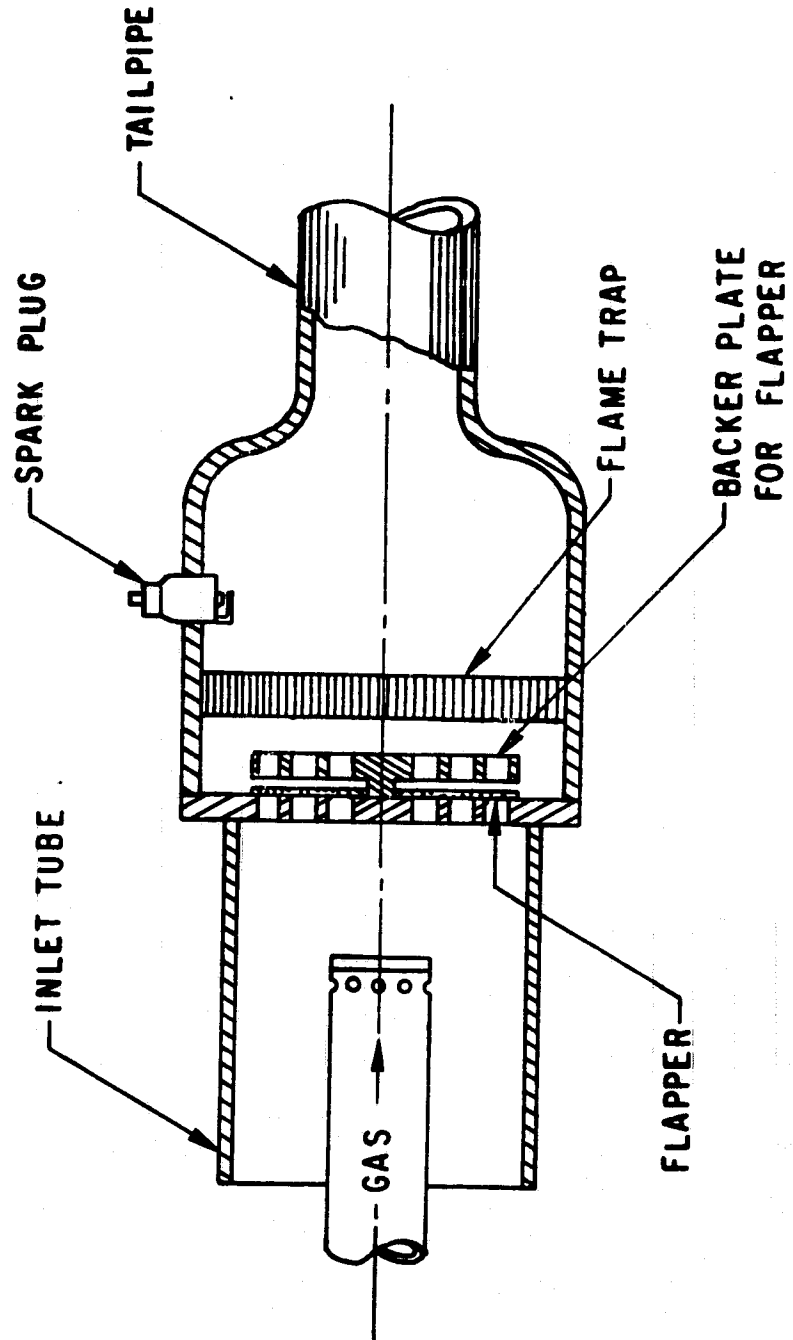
Pulse Combustion Device Using a Single Flapper Valve (Source: Ref. 21)
